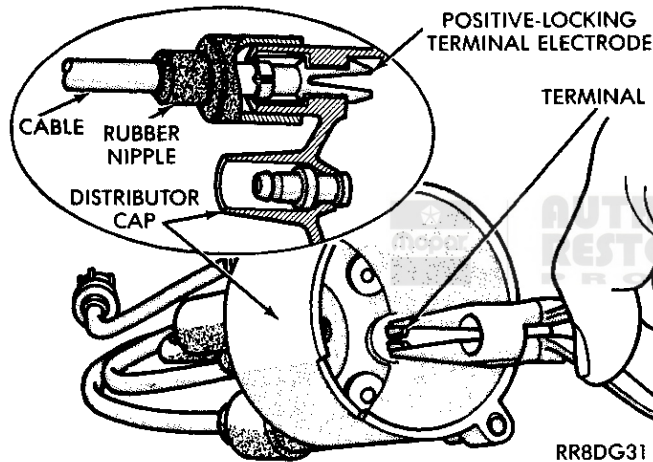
Spark Plug Cable Removal/Installation—2.5L Engine
